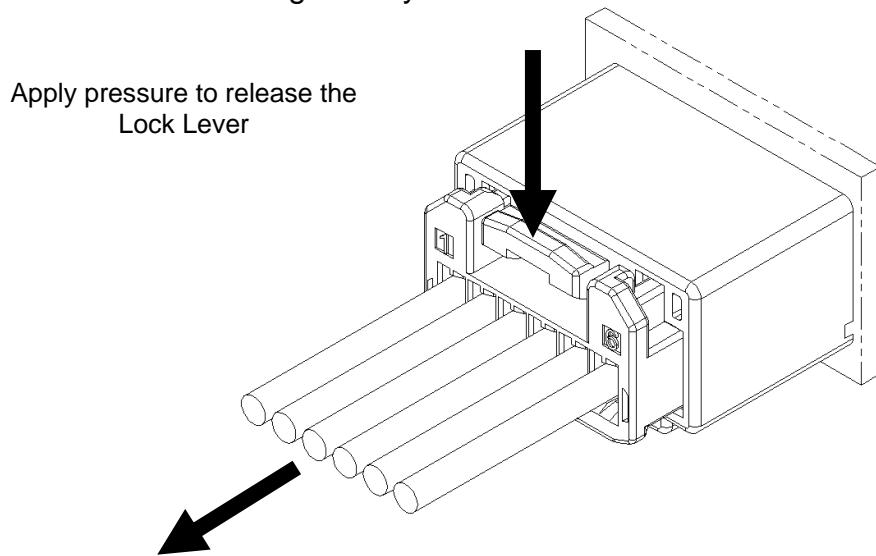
Disengaging the Female Housing Assembly from the Male Assembly (e.g. 6 positions)
